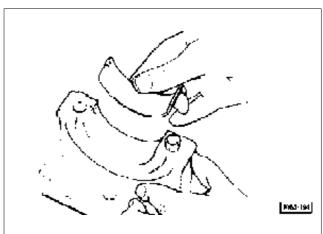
Install the main bearing shells in the front and rear crankshaft bearings. Shoulder half rings shall be secured in the rear bearing after applying some grease;
